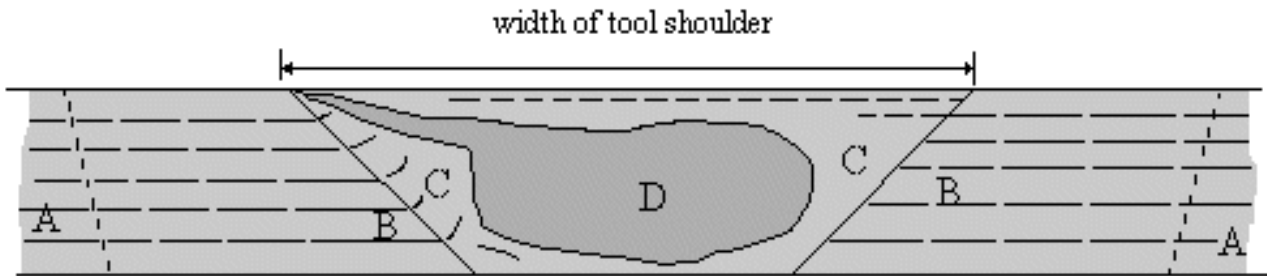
Weld zones. A Base material, B HAZ, C TMAZ and D weld nugget.
